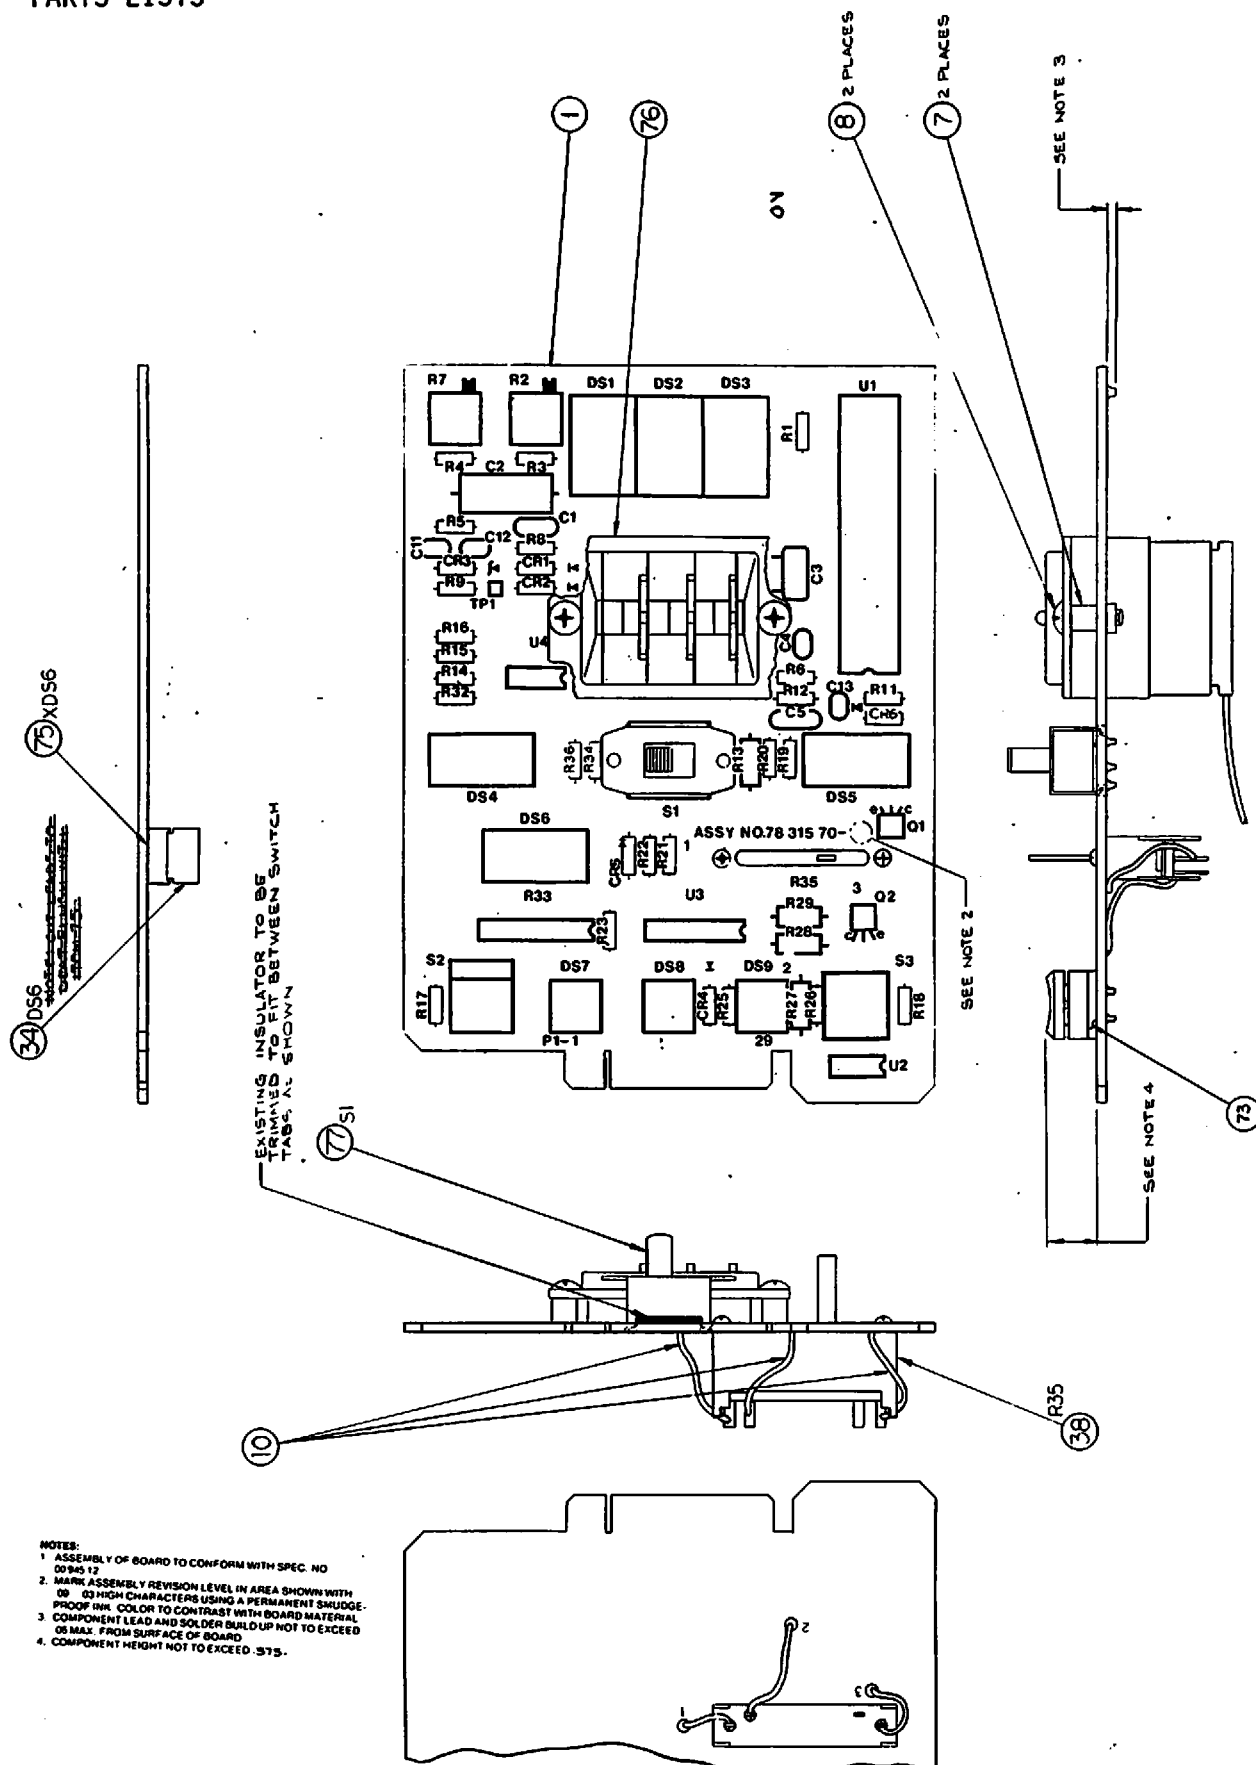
CONTROLLER DISPLAY BOARD PCB1, PARTS LOCATION DIAGRAM
